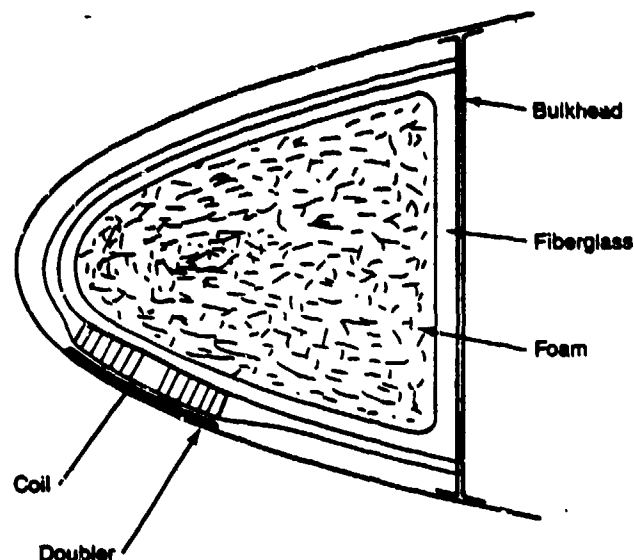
Cross-section Through Inlet Leading Edge Showing Bulkhead-Mounted EIDI Coil
